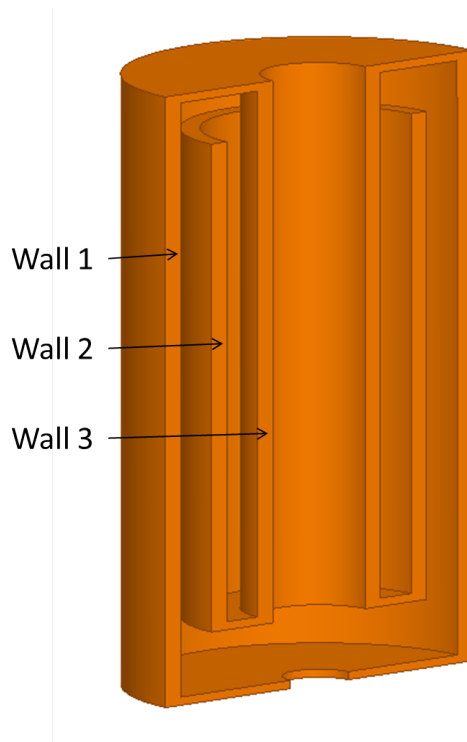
The cross-section of a double folded balun with its walls numbered.
